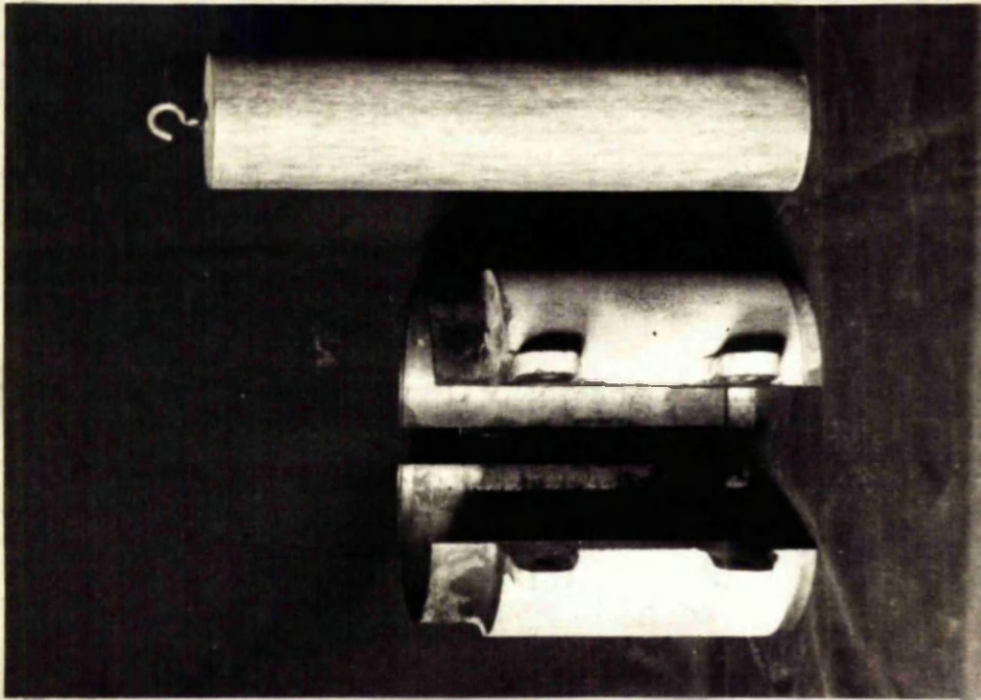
OUTSIDE AND INSIDE FORMERS.
